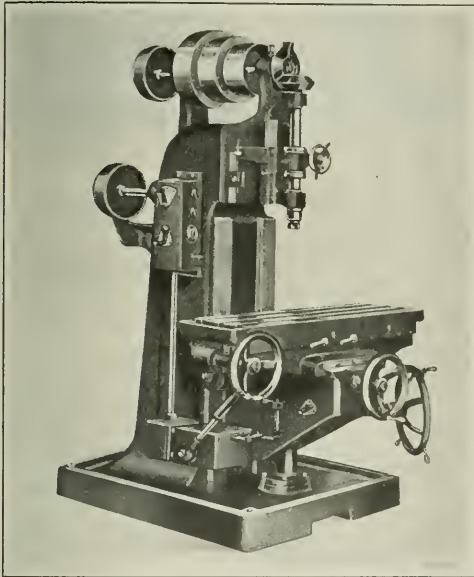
No. 6-A Vertical Milling Machine built by the Jackson Machine Tool Co.
